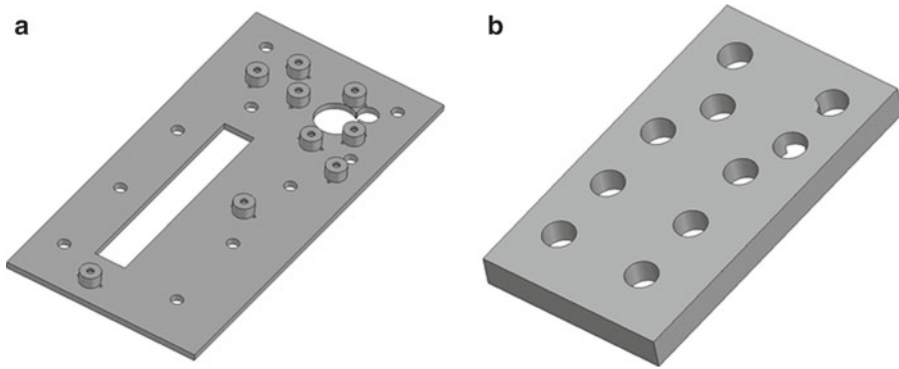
Perspective views of 3D CAD drawings of: (a) the microfluidic interface, and (b) clamping jig.
